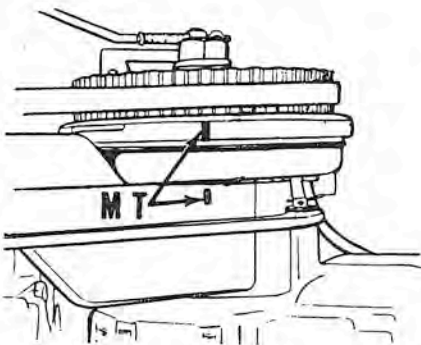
When installing magneto drive belt, first align flywheel timing marks as shown in Fig. J90, then install belt with magneto pulley and mounting bracket marks aligned as shown at (MT).
